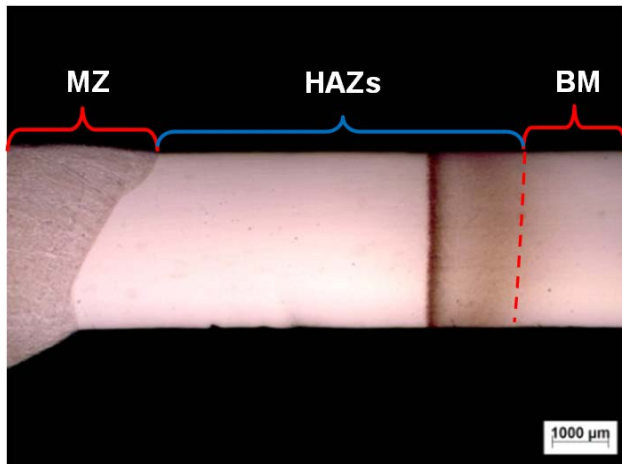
Morphology of the weld bead without subsequent heat treatment.
